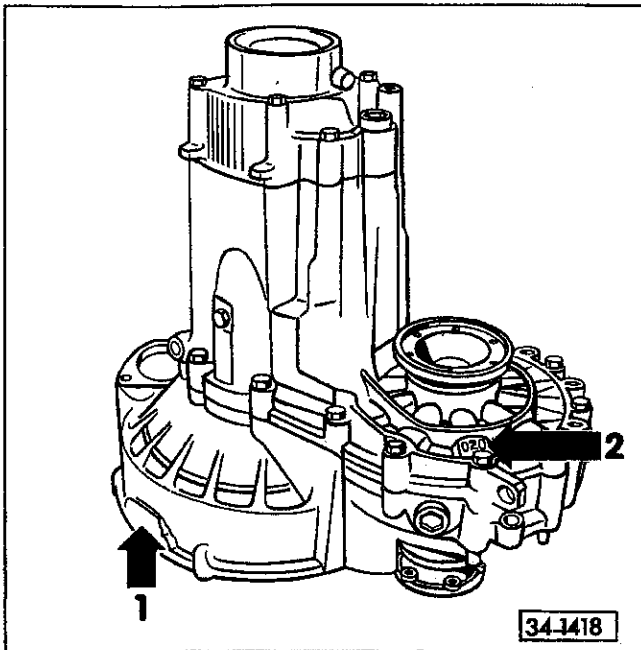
O20 transmission used on cars with 4-cylinder engines. Arrow 1 indicates location of code letters and date of manufacture. Arrow 2 indicates location of transmission type.
